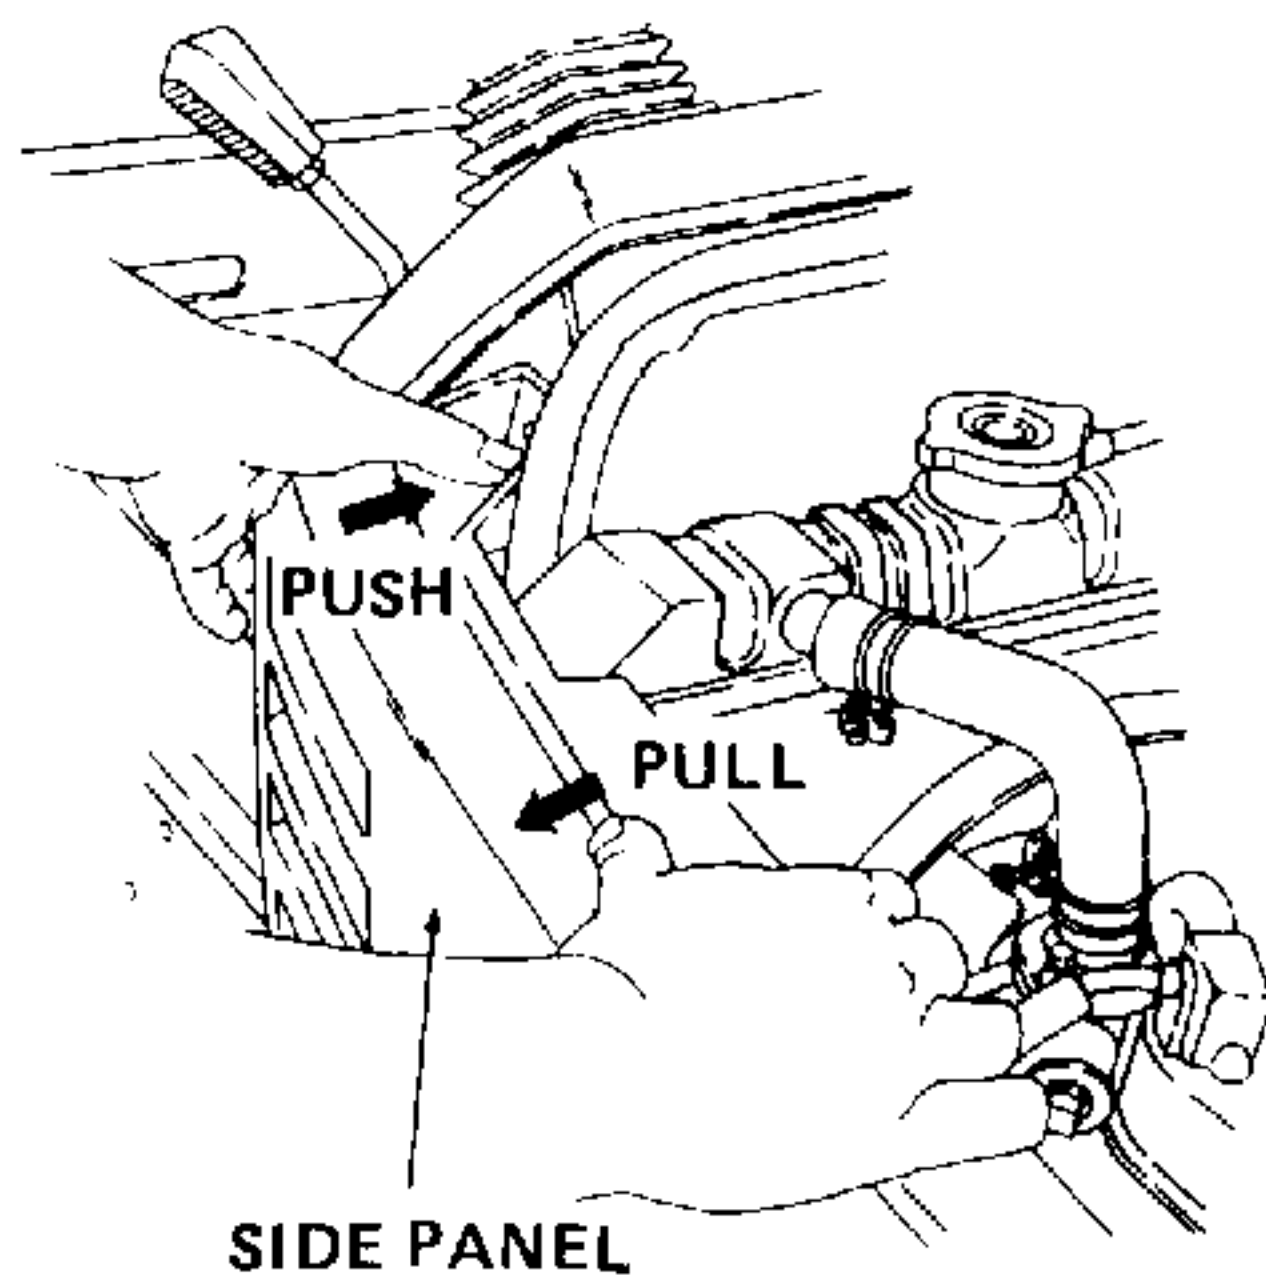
Side Panel Mounting Hole Positioned on Stud.
